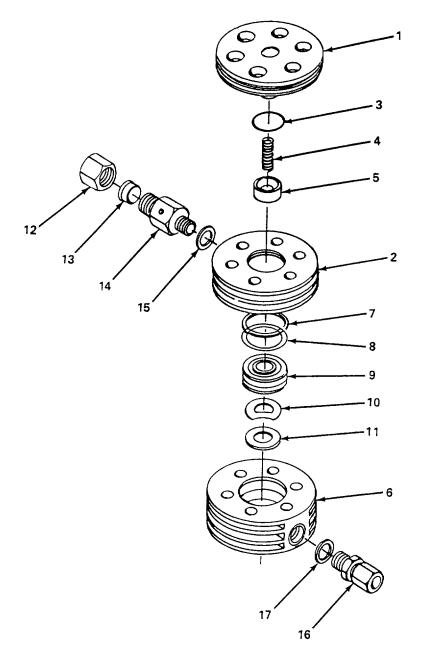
4th Stage Valve Head Assembly, Repair.
